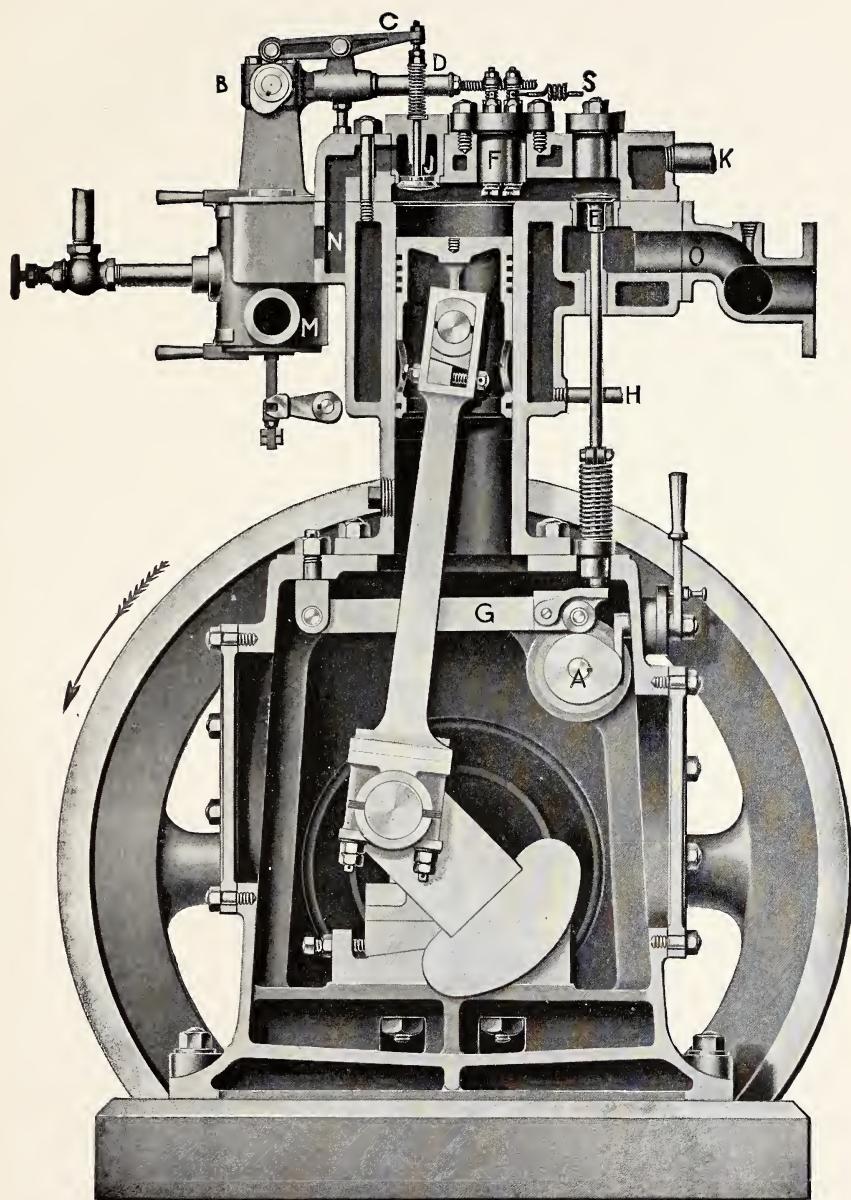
SECTION OF WESTINGHOUSE GAS ENGINE.
